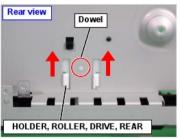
HOLDER, ROLLER, DRIVE, REAR Removal
